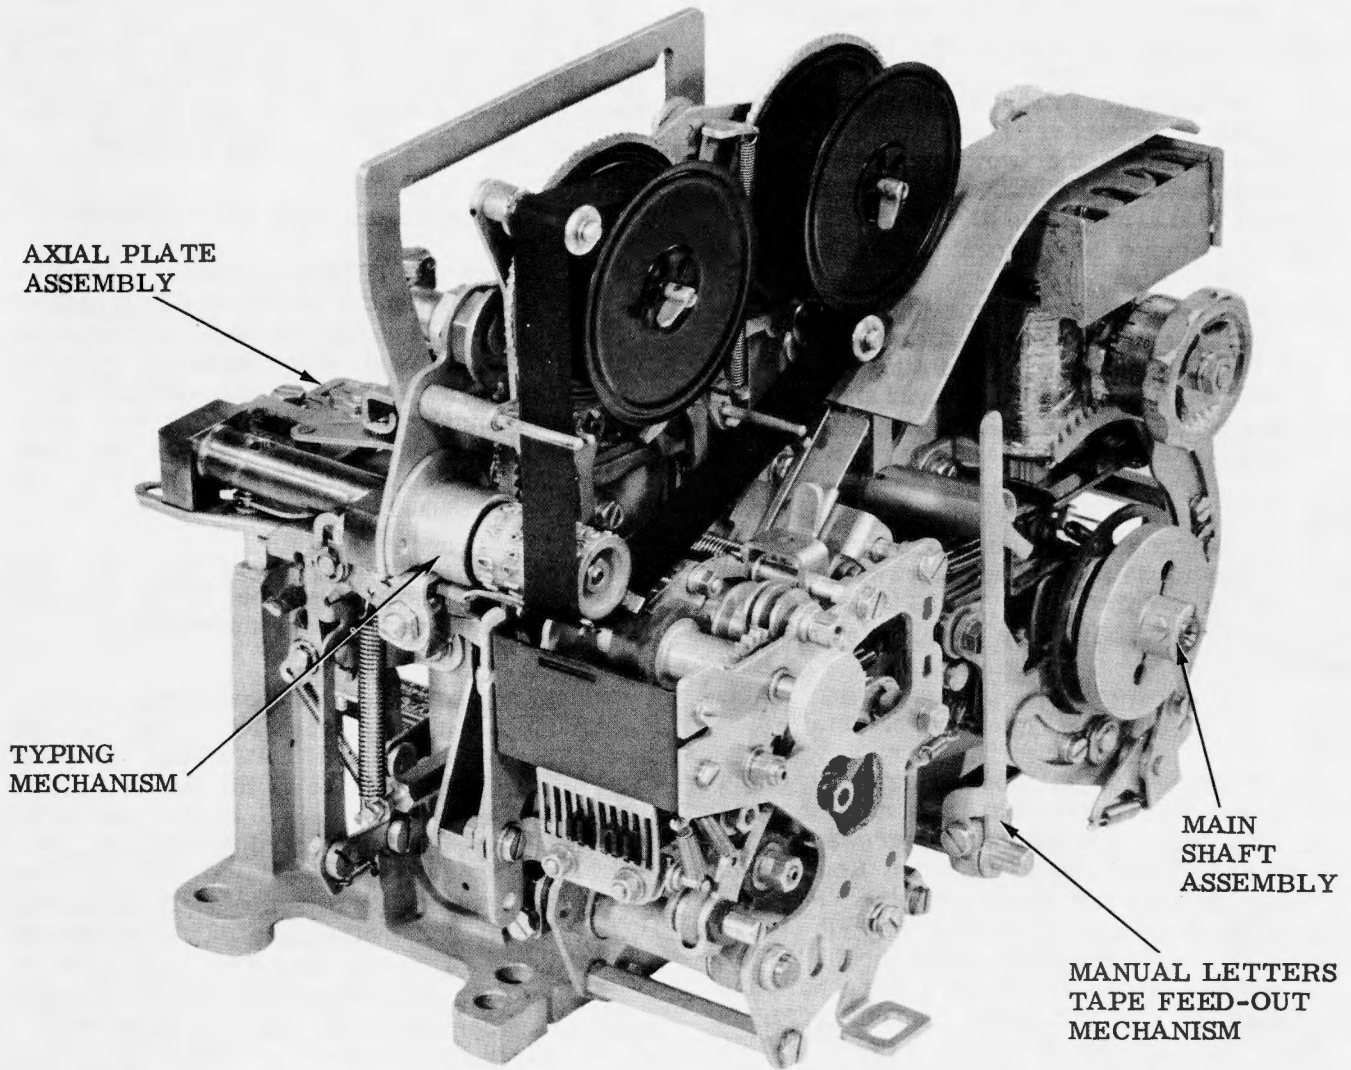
28 Tape Printer Unit With Manual Letters Tape Feed-Out Mechanism
